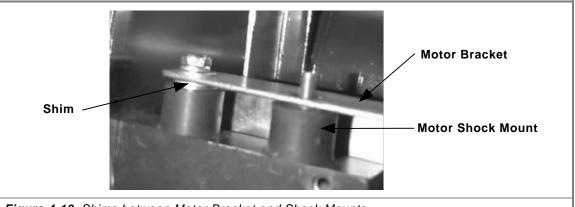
Shims between Motor Bracket and Shock Mounts.
